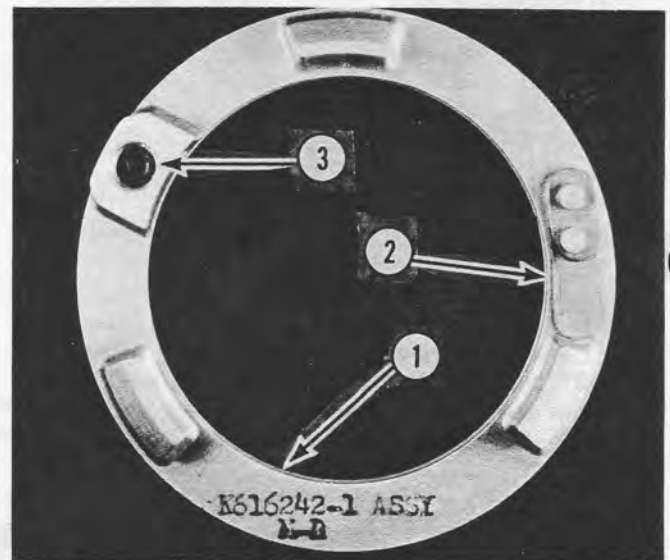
Ring seal 2. Flapper valve 3. Grease fitting boss
